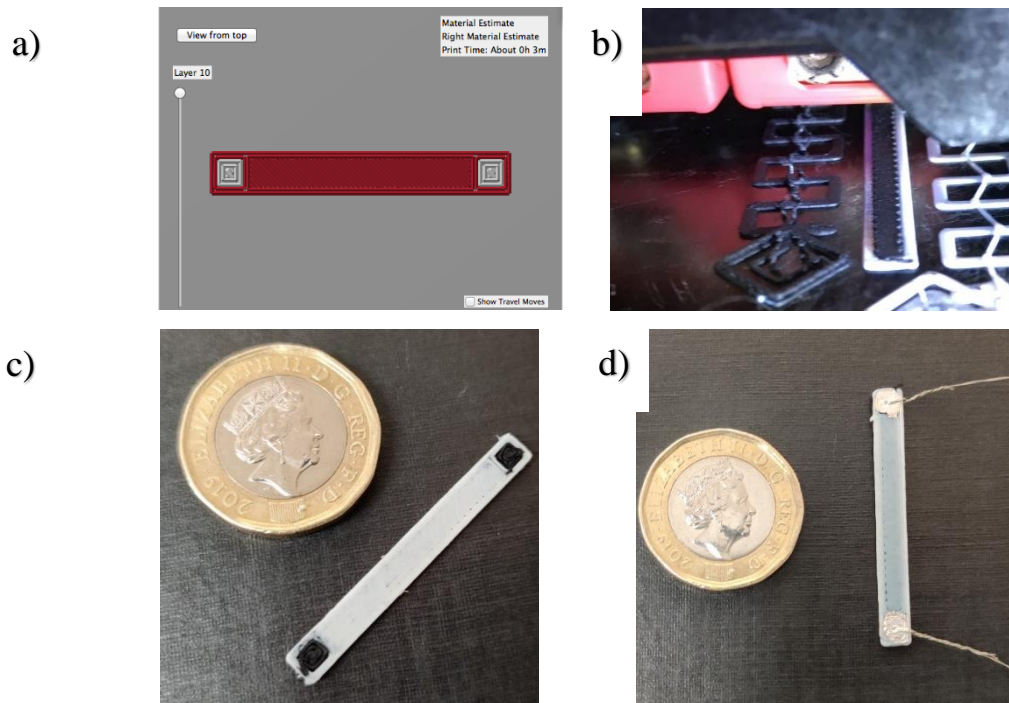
a) Image of the 3D merged model converted into layers for 3D printing process, b) Image of the dual extrusion 3D printing process in action, c) Image of 3D printed sample as off the printer and d) 3D printed sample wired and silver coated.
